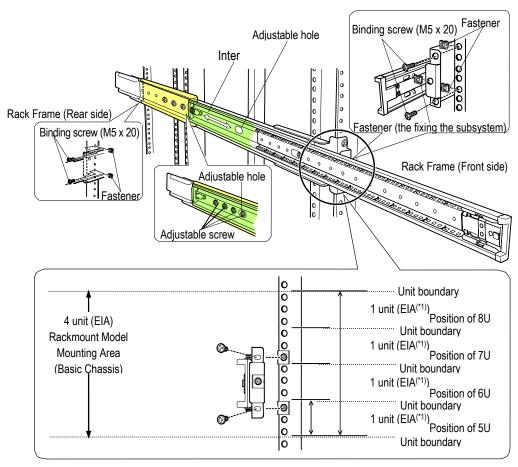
Fixing the Rails to the Rack Frame (Rev.A/Rev.B)
